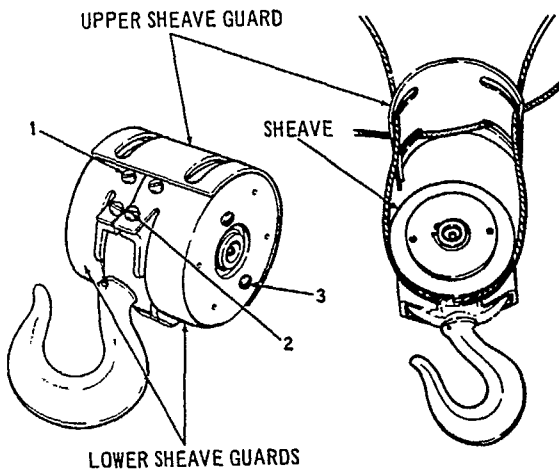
Installing Wire Rope in Double Reeved Bottom Block
